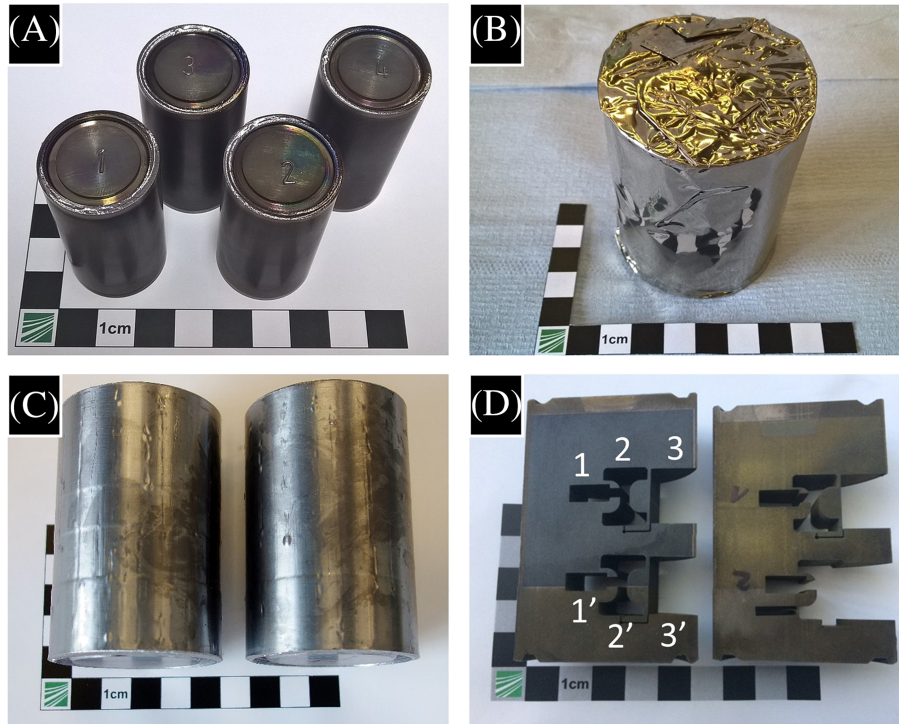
A, Picture of four prototypes after welding of the Ta/Ta_{2.5}W capsule. B, Picture of one prototype after welding and wrapped with the getter foils before the HIPing cycle. C, Picture of two prototypes after the HIPing cycle and removal of the getter foils. Cladding deformation and corrugation is appreciable. D, Picture of two half prototypes after cross-sectional cut with EDM. Specimen extraction can be appreciated in 1,2,3 for target to target materials bonding and 1', 2', 3' for cladding to target materials bonding. Specimens “1” were dedicated for thermal conductivity measurements, specimens “2” for tensile testing and specimens “3” for interface microscopy
